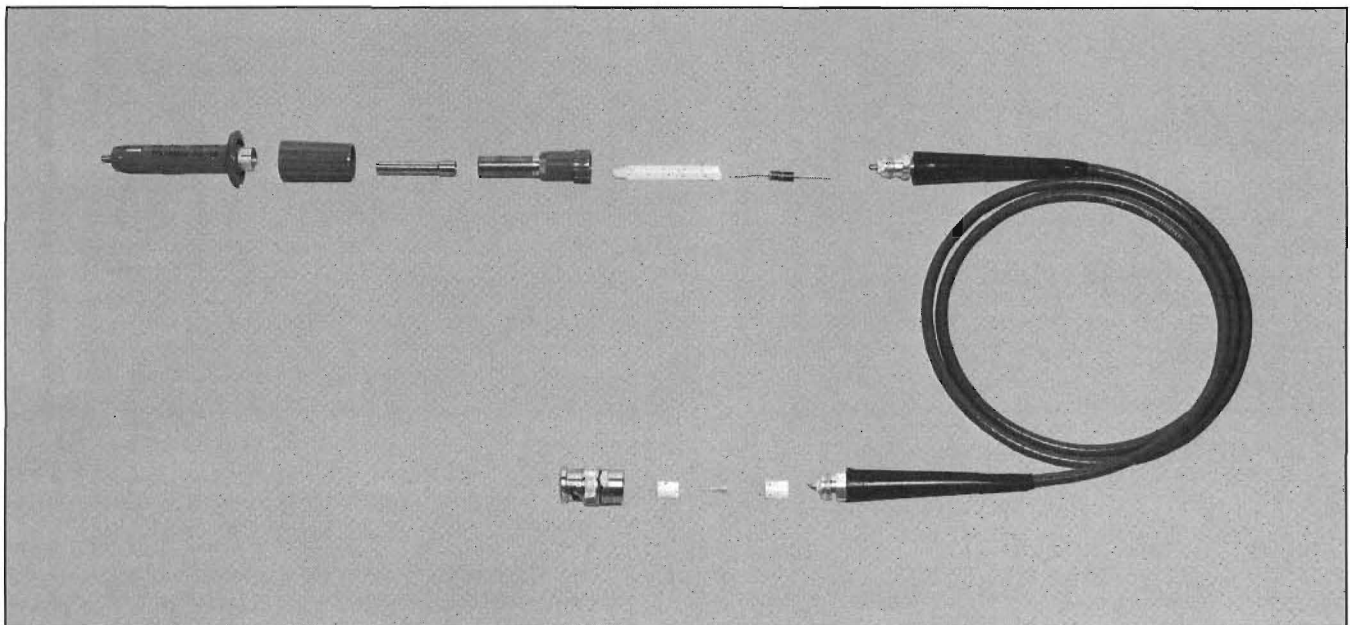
The P6006 Probe disassembled to show the individual parts making up the probe.
